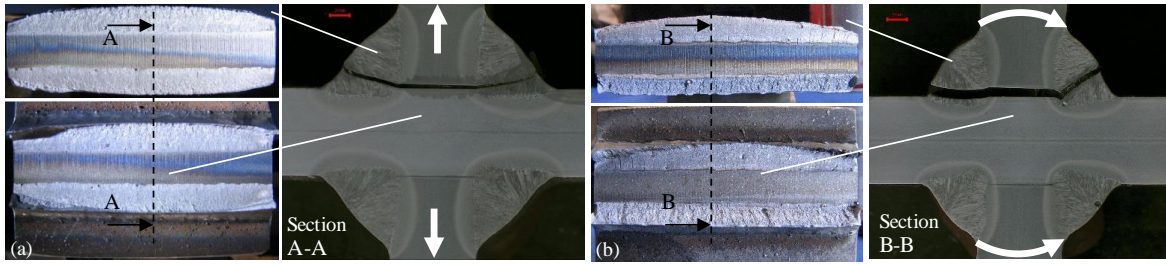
Typical fracture surface and failure paths in (a) axially loaded joints (FWB_DYN17) and (b) bending loaded joints (FWB_DYN5).
